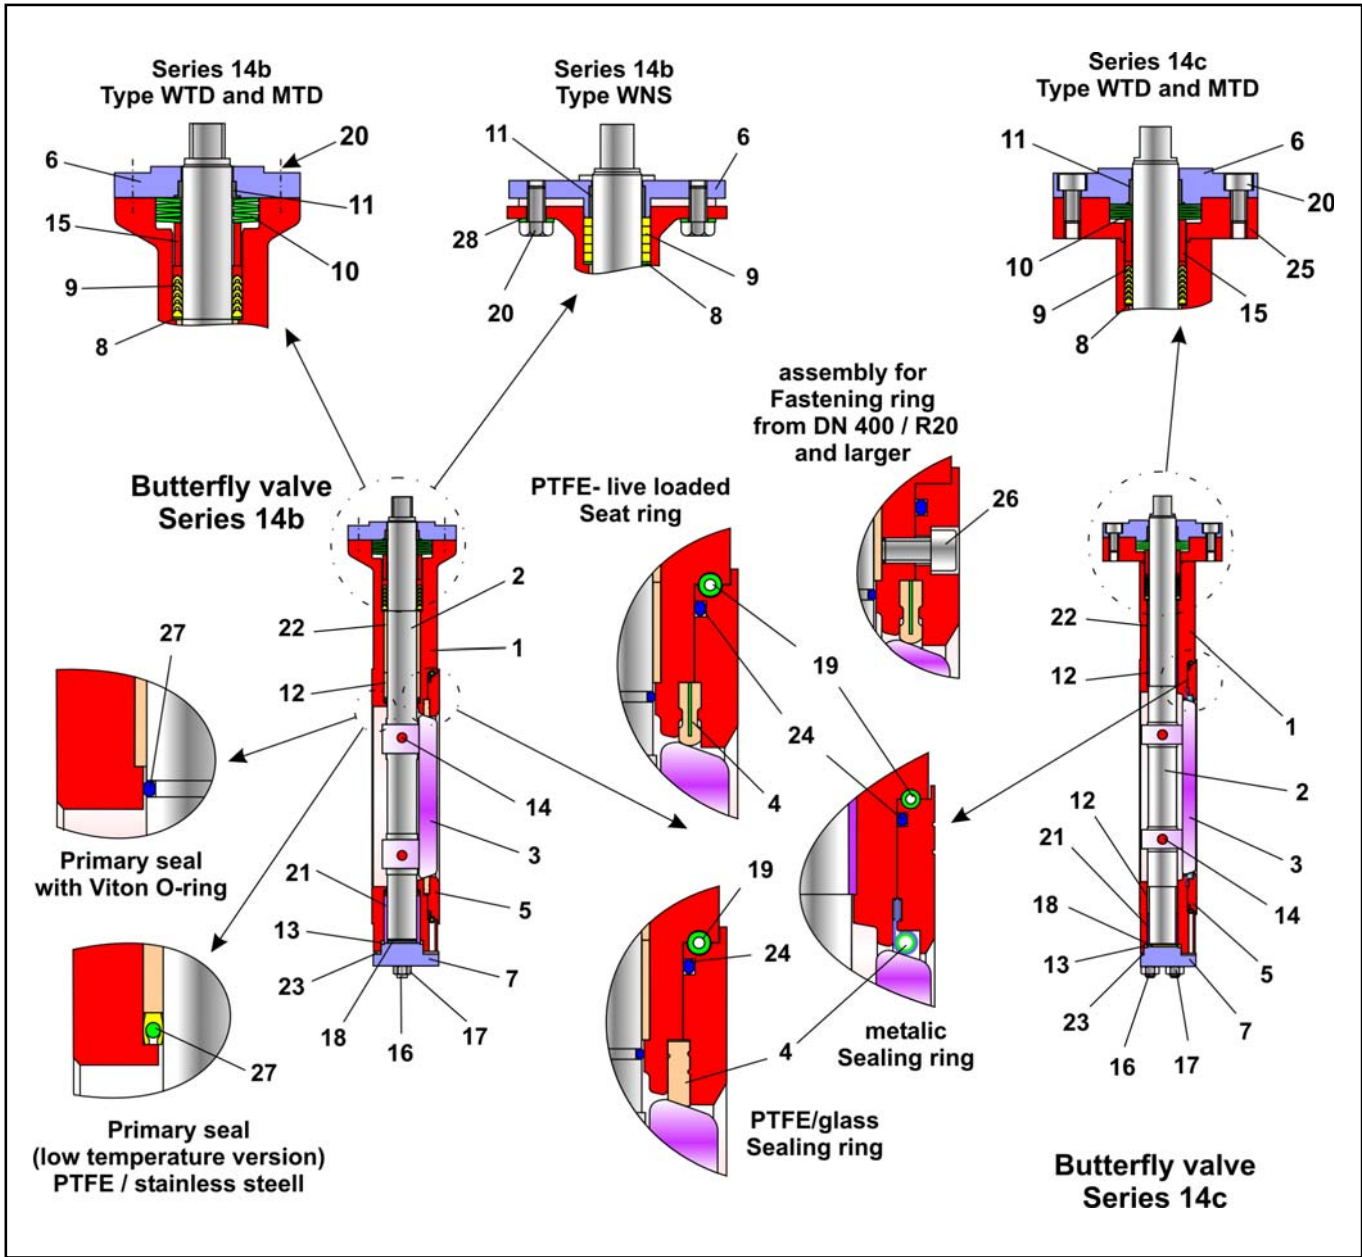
Sectional diagram of Series 14 Butterfly Valve
